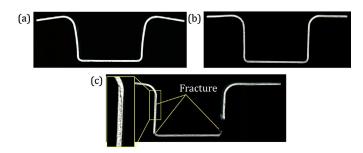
Bent A2024-T4 aluminium alloy sheets into hat shape by cold and hot stamping for using resistance heating of T = (a) 20, (b) 400 and (c) 500 °C.
